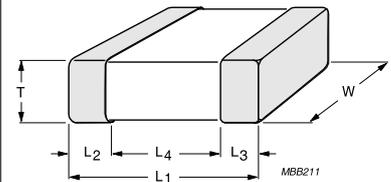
Surface mounted multilayer ceramic capacitor dimension
